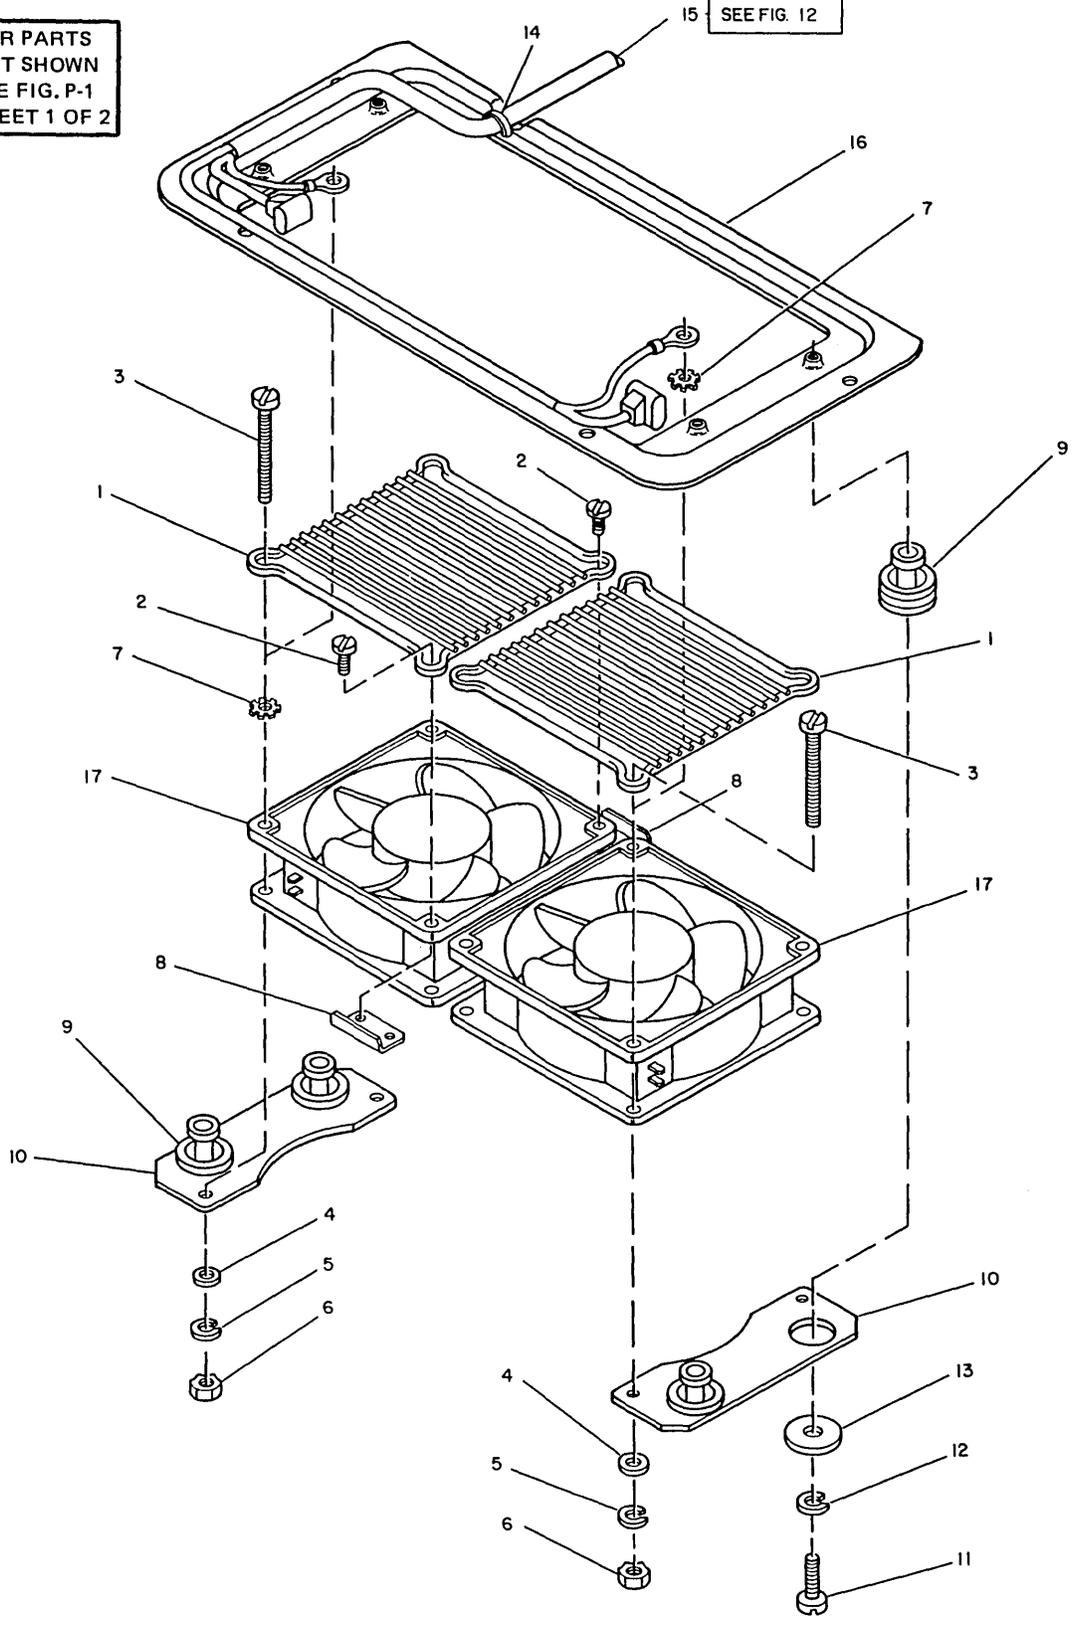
A. FAN PLENUM ASSEMBLY - OLD STYLE
